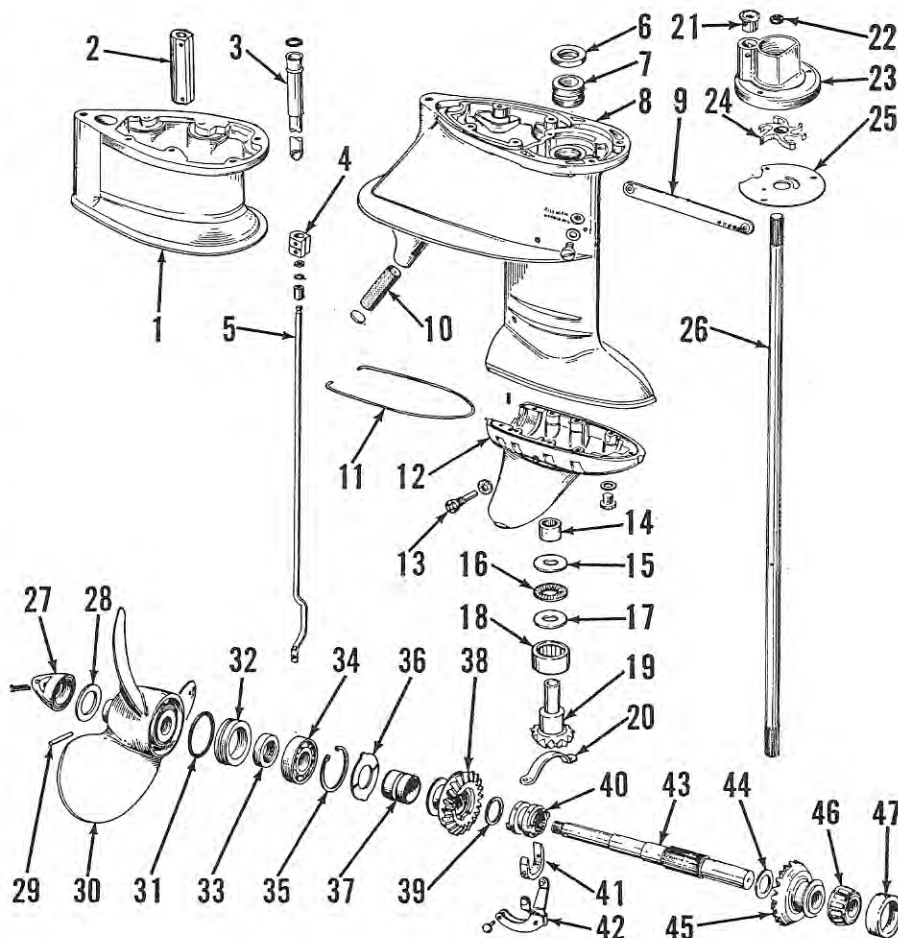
Exploded view of lower unit gear housing, water pump and associated parts. items (1 through 3) are used in "Long" models only.
